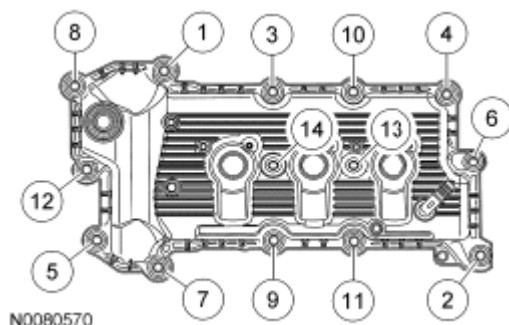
Identifying Valve Cover & Bolts In Tightening Sequence
